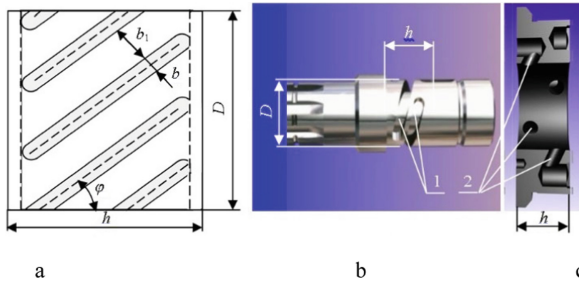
Implementation of the use of additional working windows: a – design scheme for determining the geometric parameters of the commuting grooves; b – hydraulic motor shaft; c – movable distributor; 1 – commutation shaft grooves; 2 – additional channels of the movable distributor; h – the height of the movable distributor; D – the diameter of the hydraulic motor shaft; b – groove width; b_1 – the distance between grooves.
